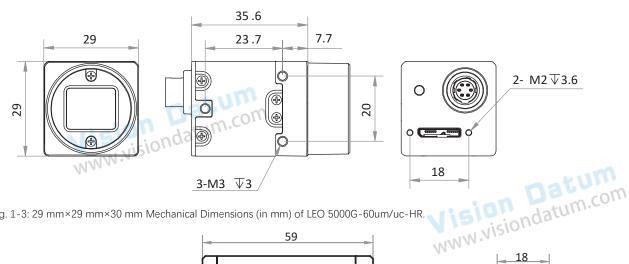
29 mm×29 mm×30 mm Mechanical Dimensions (in mm) of LEO 5000G-60um/uc-HR.
